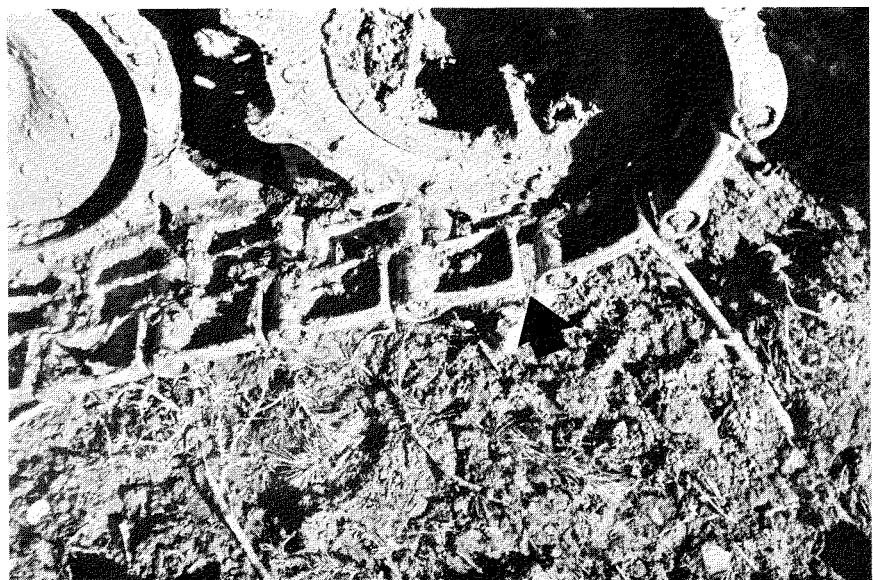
Figure G. Track bushing failure. Arrow indicates enlarged clearance between track pads due to bushing failure. Normal clearance can be seen between adjacent pads.
